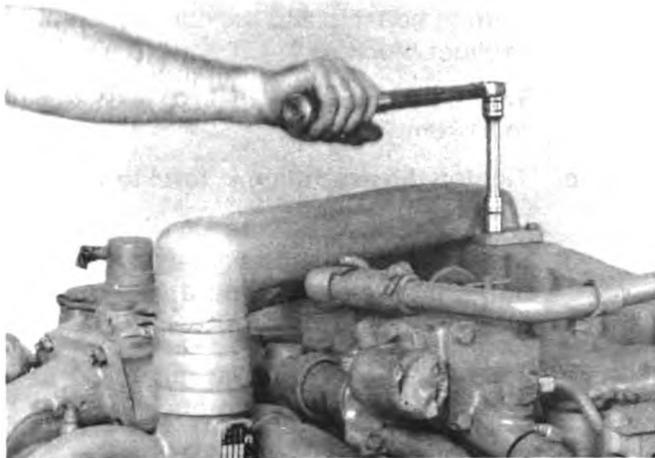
Tighten The Capscrews For The Crossover.
